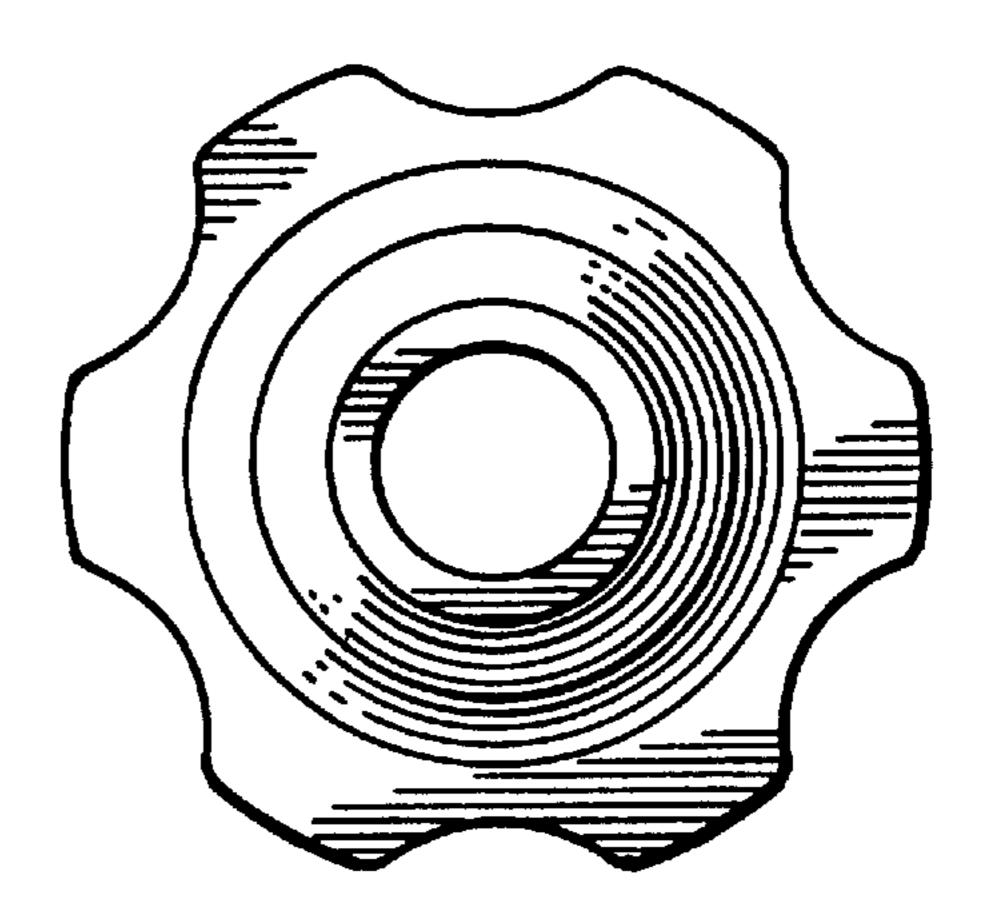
is a top view of my new improved flushometer seal, the bottom being a mirror image thereof;
